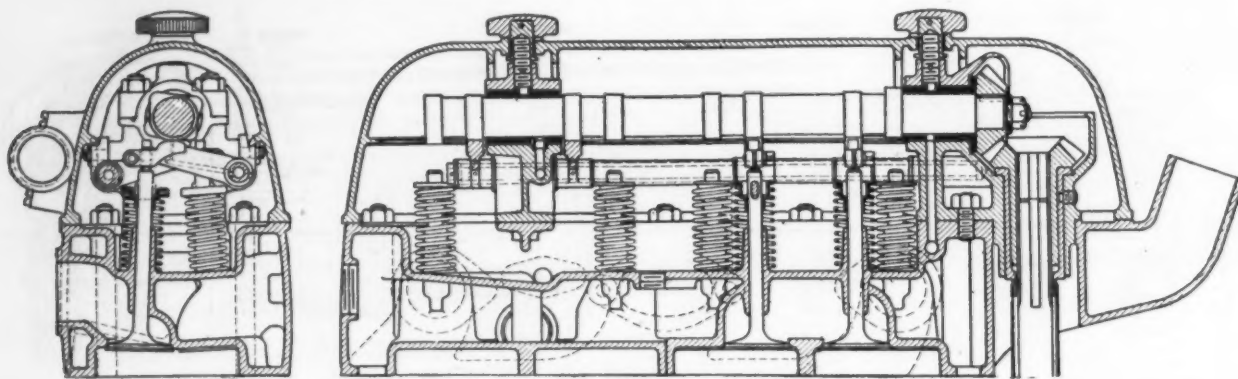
THE UPPER PORTION OF THE WOLSELEY OVERHEAD CAMSHAFT ENGINE
